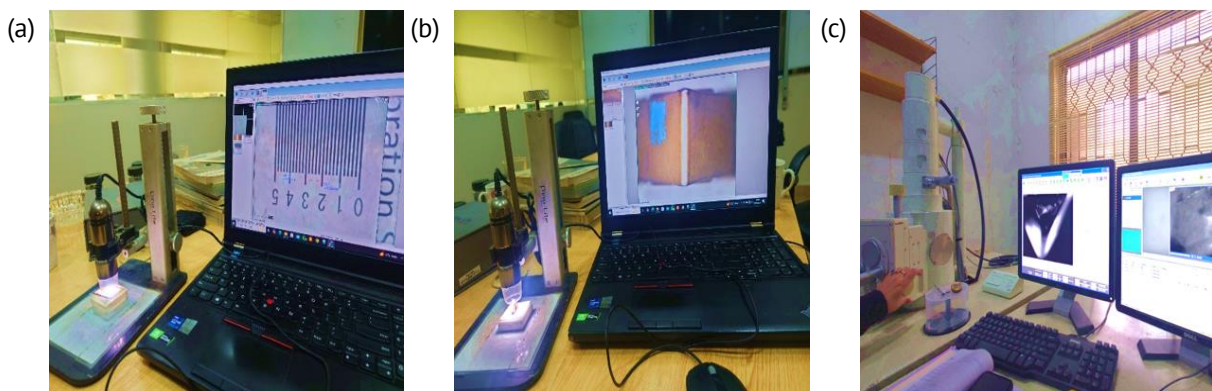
Tool wear measurement and analysis setup: (a) calibration of Dino-Lite microscope; (b) flank wear measurement on tool edge; (c) SEM/EDS analysis of worn tools
